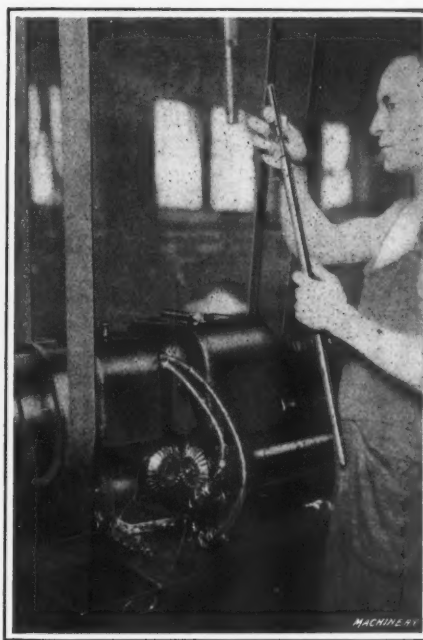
Gaging Accuracy of Gun Barrel after Reaming
